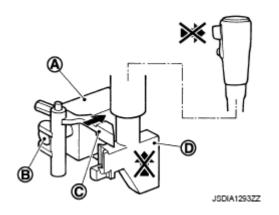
Identifying Shift Lock Operation "P" Courtesy of NISSAN MOTOR CO., U.S.A.
